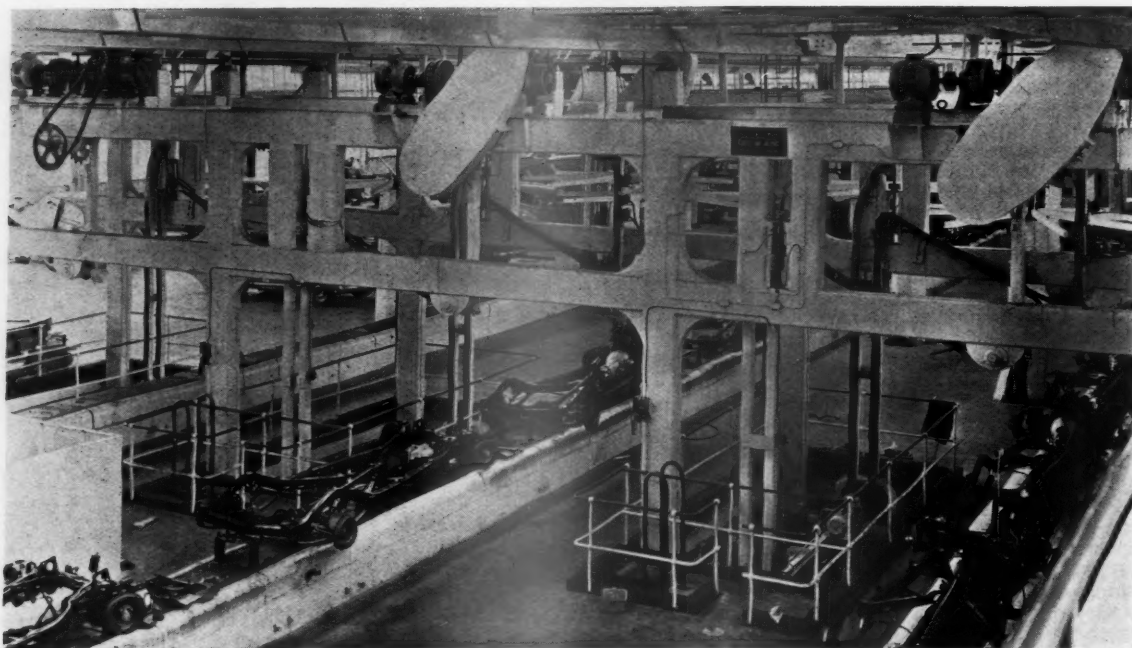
Drive units installed in the Austin assembly factory for synchronizing movements of elevator units and assembly tracks
